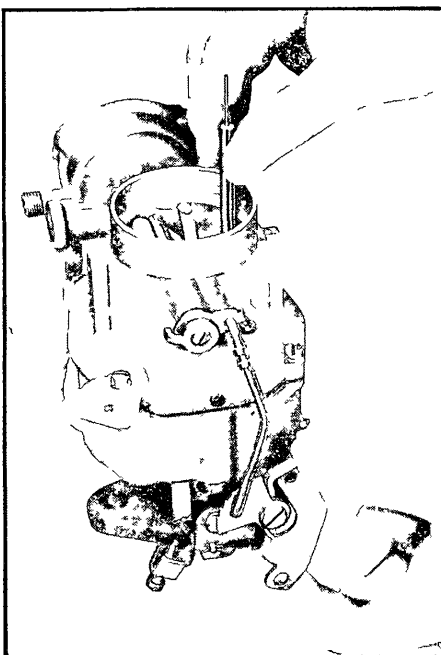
KK Checking unloader adjustment on Rochester BC carburetor. 1951-52 Pontiac Six
